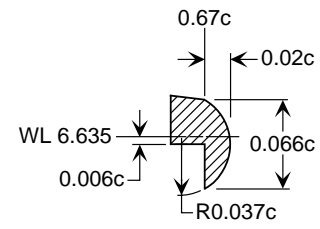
Details of wing-mounted thrust reverser model. Dimensions are in inches.
